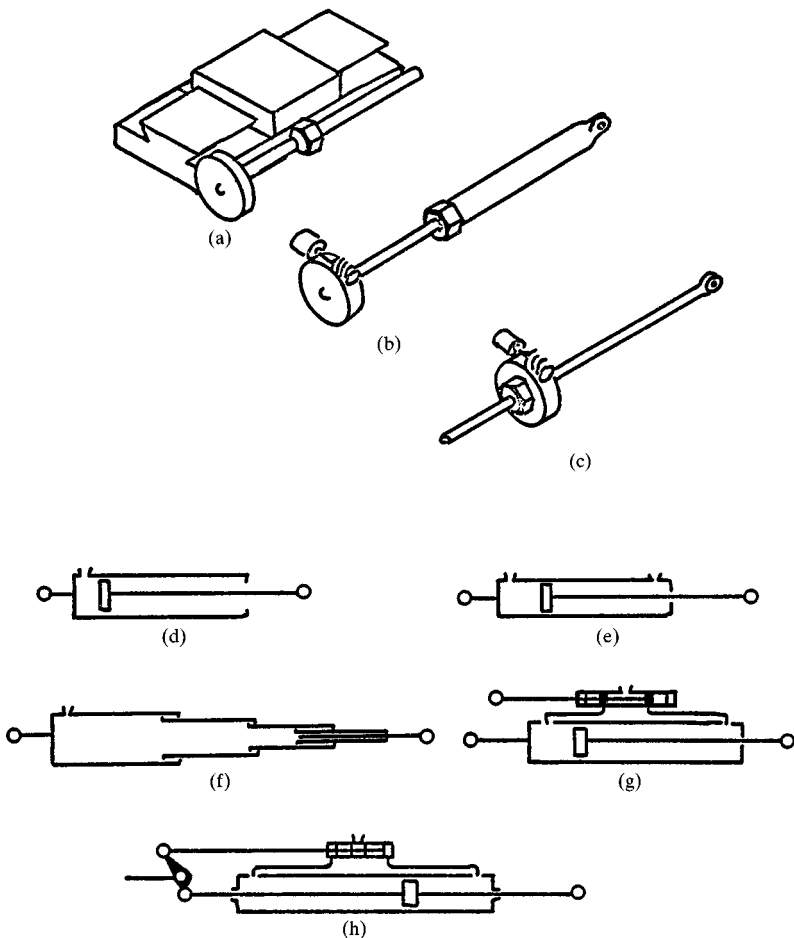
Linear actuators. These are devices that cause a straight-line displacement between two machine elements. (a) Lead screw; (b) worm gear with stationary nut; (c) worm gear with stationary screw; (d) single-acting hydraulic cylinder; (e) double-acting hydraulic cylinder; (f) telescoping hydraulic cylinder; (g) hydraulic cylinder with positional feedback; (h) hydraulic cylinder with floating link feedback.
